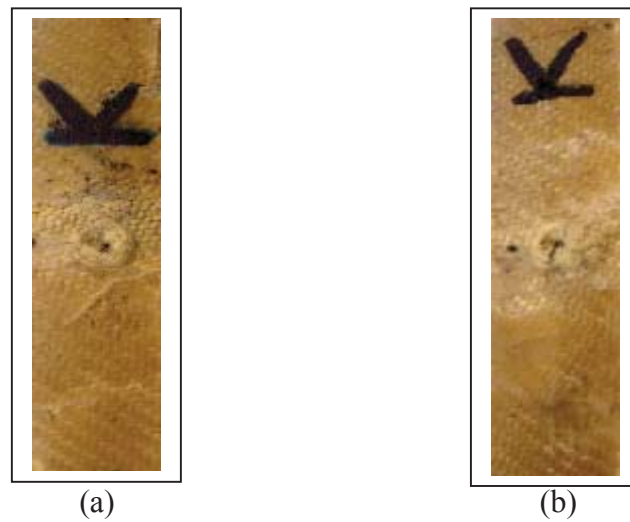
fracture modes of (kevlar/ polyester) a- moulded-in hole, b- drilled hole
